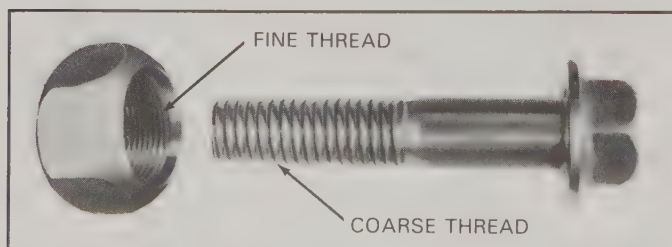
Threads of different types and styles cannot be used together. The Fine thread on the nut will not mate properly with the Coarse thread on the bolt. (RB&W Corporation)
